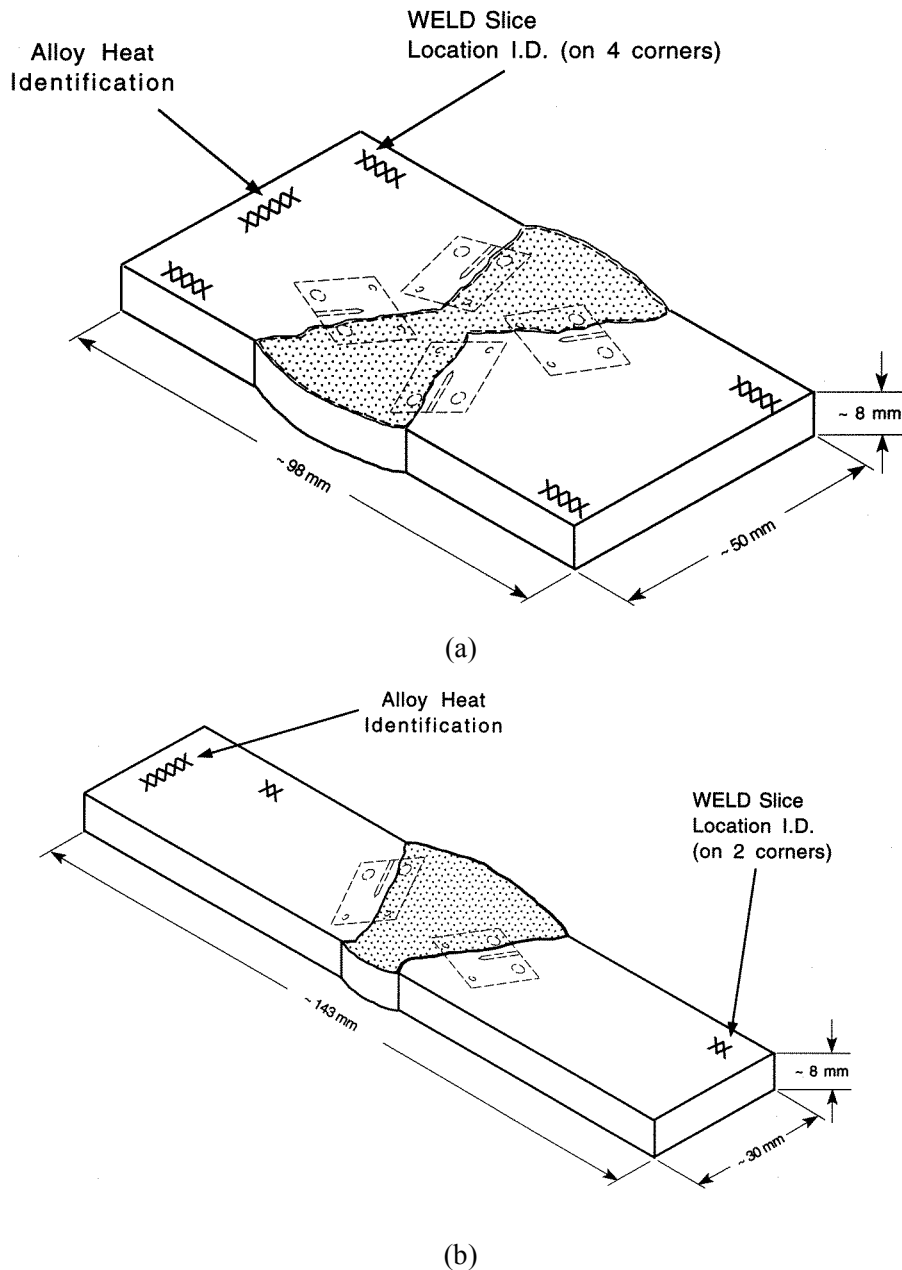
Orientation of the 1/4-T CT specimens from the (a) Grand Gulf H5 SA weld HAZ and (b) laboratory-prepared SMA weld HAZ.
